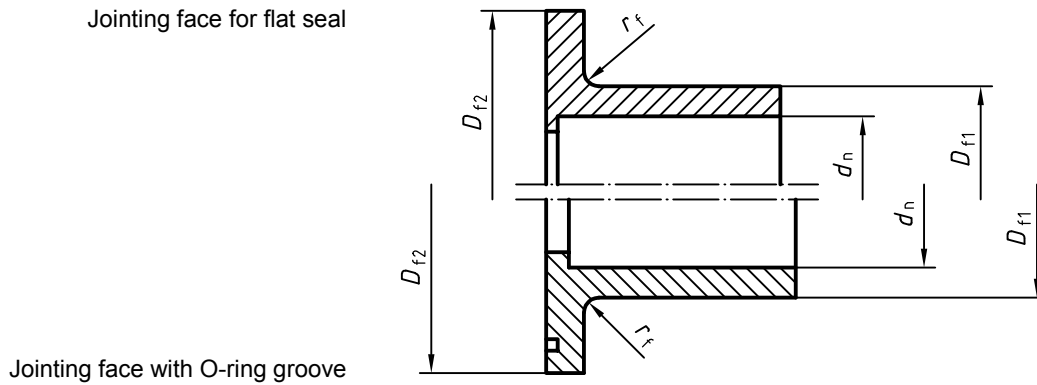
Dimensions of flange adaptors for solvent cementing
